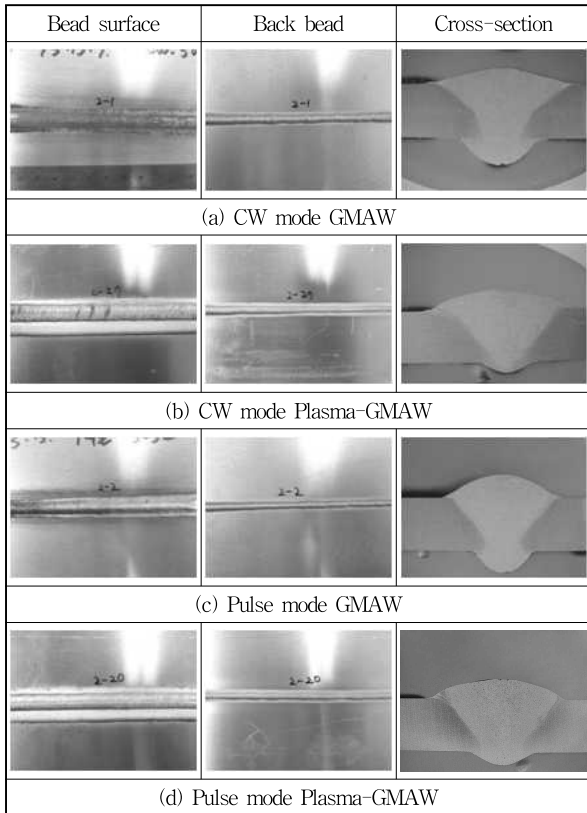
Weld bead shapes for Al 5052 alloy
